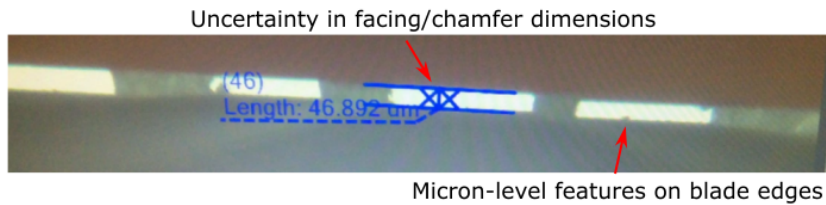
Corner features and machining tolerances on the blade dimensions on the order of 1-2 um
